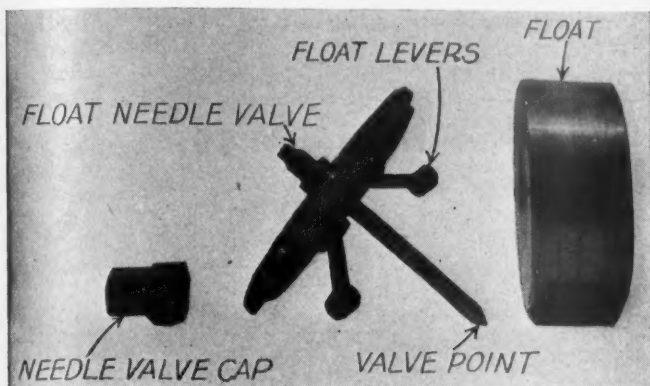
Fig. E: Showing the Order of Disassembly of the Float Chamber Components.
